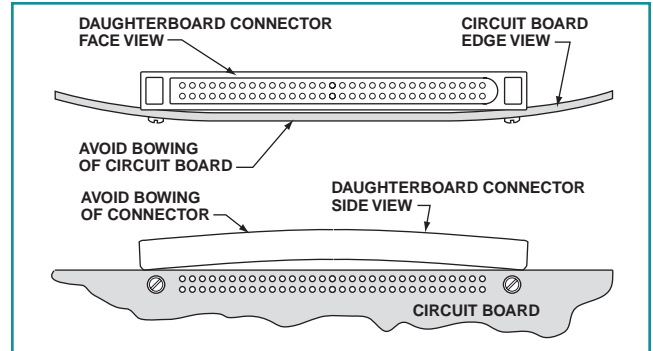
AVOID BOWING OF CIRCUIT BOARD AND/OR CONNECTOR WHEN ASSEMBLING DB CONNECTOR
